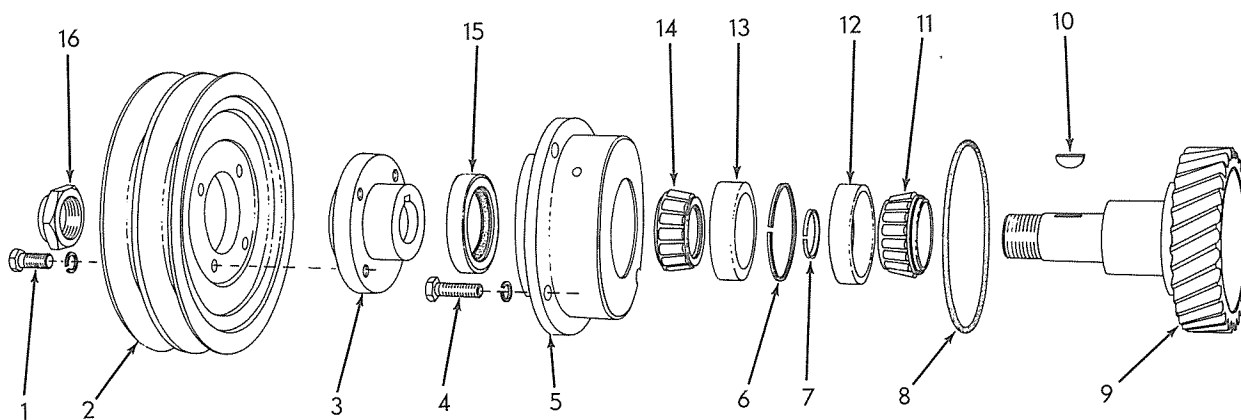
A—Fan Drive Details (Crawler Tractor Engines w/Roosa Master or Bosch (Germany) Fuel Injection Pump) (T-72379)
